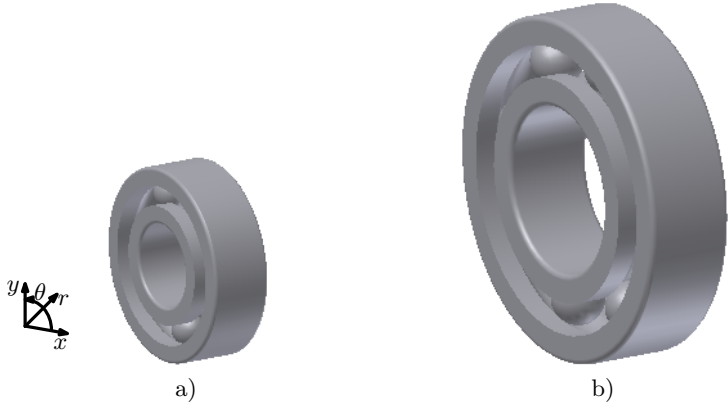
a) SKF 6202 single row deep groove ball bearing, and b) NSK 6206Z deep groove ball bearing.
